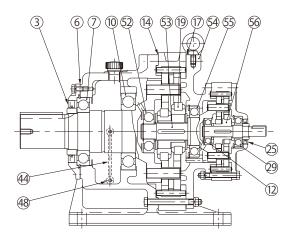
Type CHFM (Horizontal, Gearmotor), 1 Stage Reduction (Example: Frame size 6165)
